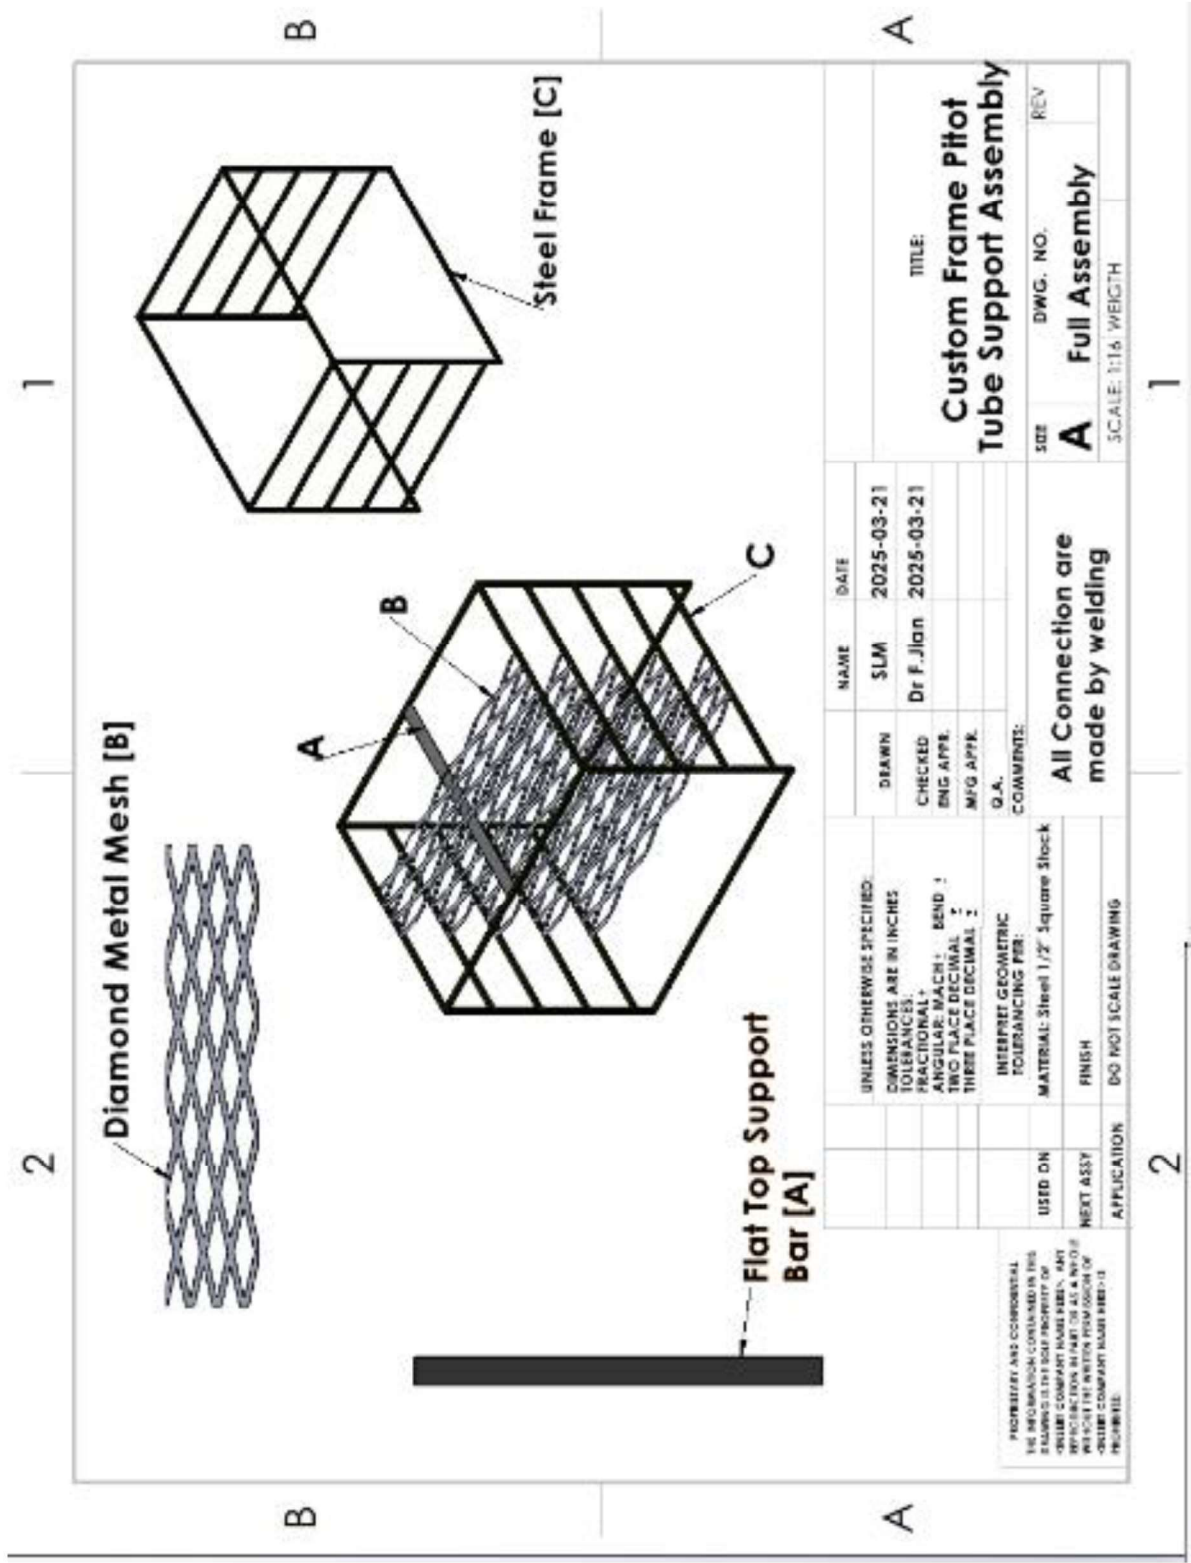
Detailed engineering drawing of the full subsystem assembly showing placement of the diamond metal mesh, flat top support bar.
